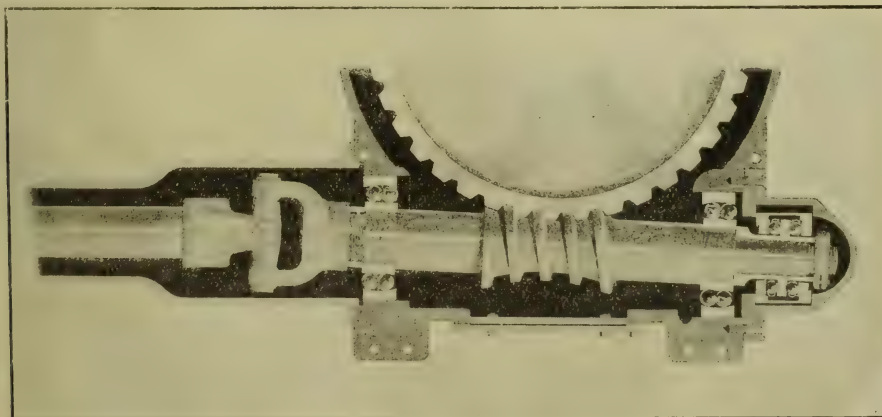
Worm Shaft fitted with Ball Bearings.
